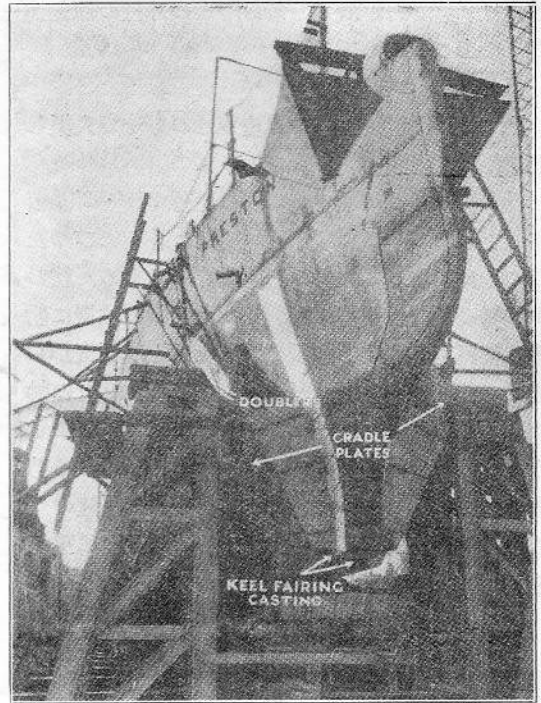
Sagging Test. Quarter View, showing After Tower Offset between Cradle and Hull Bottom fairing Casting, &c.
